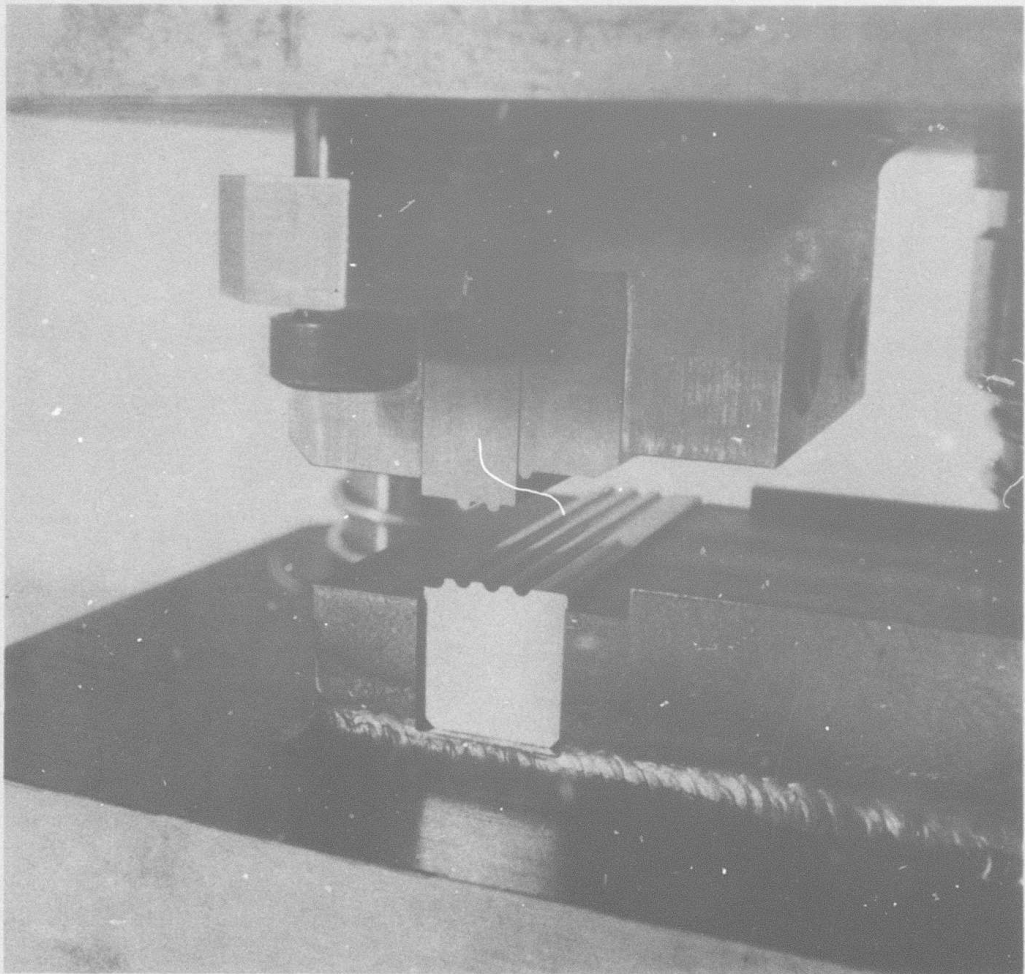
Tooling for Forming of Corrugated Foil Support
